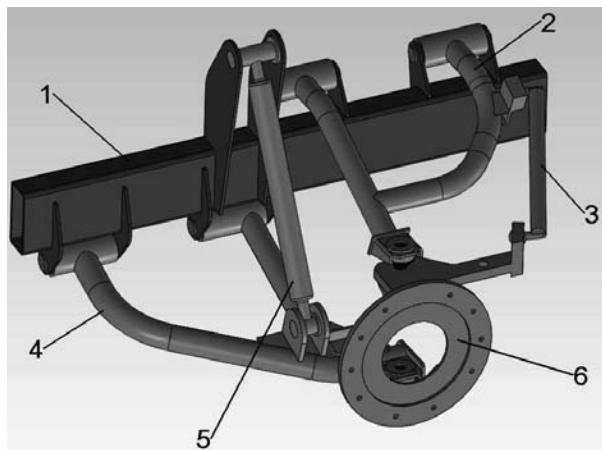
Model of single-wheel suspension system in the examined vehicle: 1 – part of the vehicle frame, 2 – upper rocker arm; 3 – anti-roll bar, 4 – lower rocker arm; 5 – hydroactive actuator, 6 – steering knuckle
